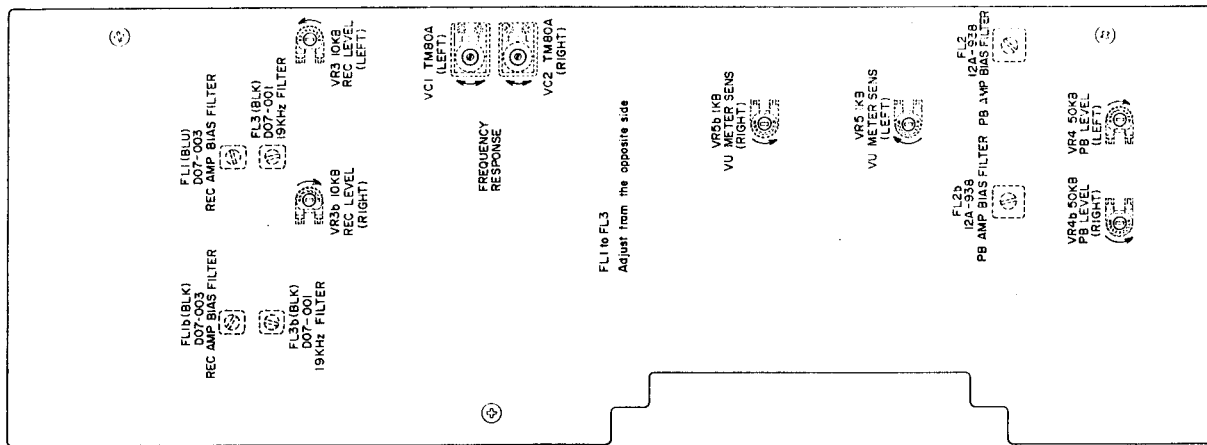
Amp P.C. Board LE-5701A (CX-4000DB)
